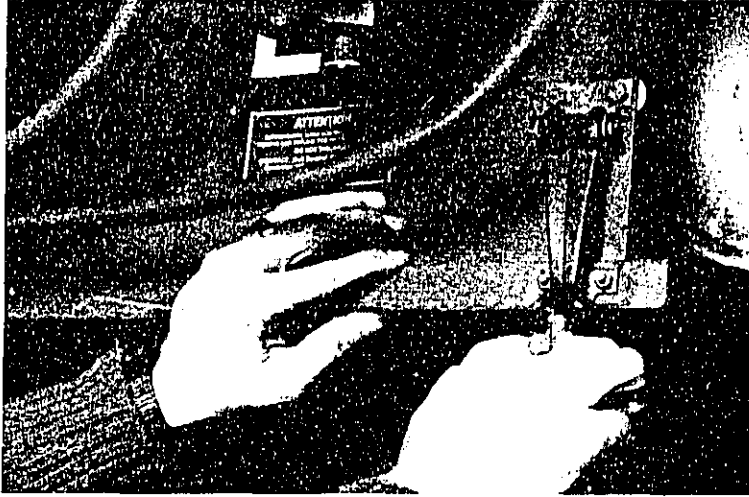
RUBBER LATCH USED TO SECURE REAR BOTTOM PANEL (B3).
